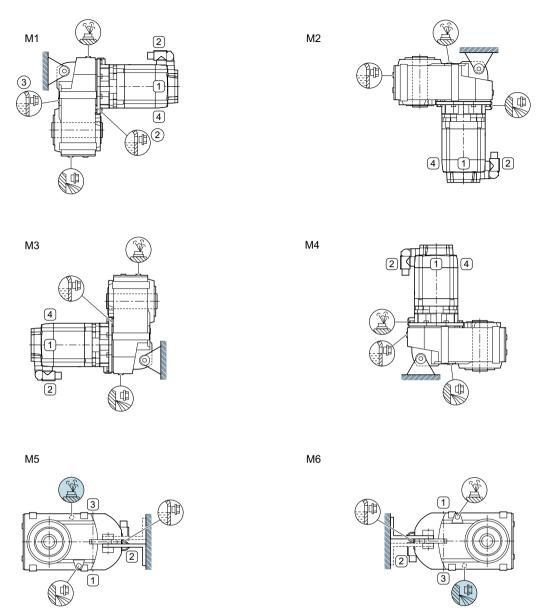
Mounting positions for servo parallel shaft geared motors FZAD and FDAD, shaft-mounted design, frame sizes 39 - 129, 2 stage and 3 stage
